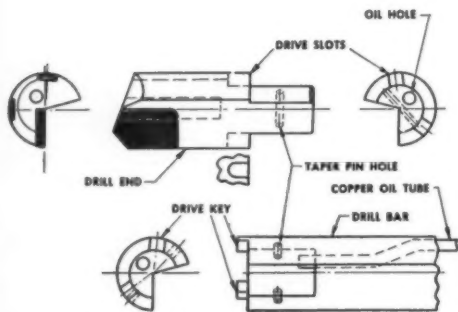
Wear strip detachable type of drill and mating socket in a Pratt & Whitney drill bar.
